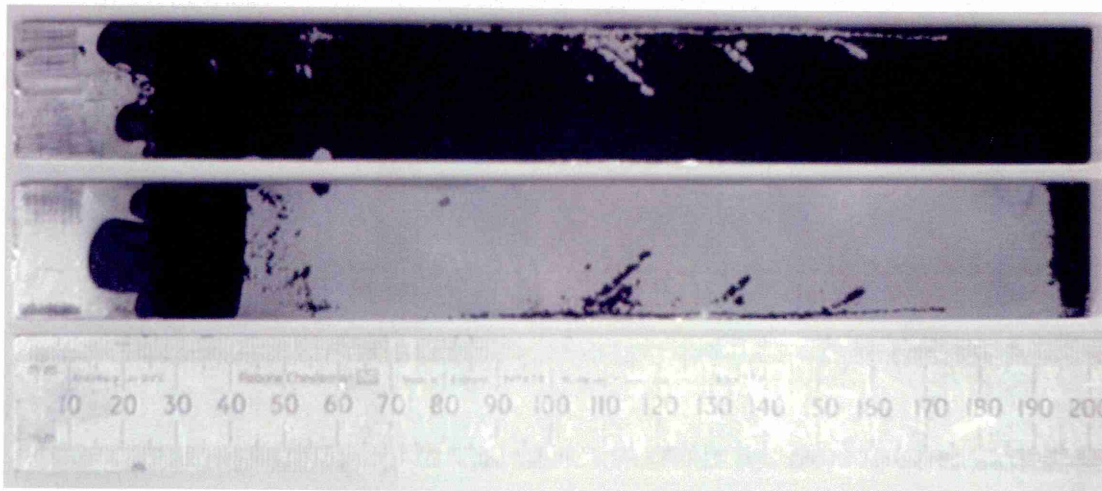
Alumina grit blast fractured wedge test specimen
